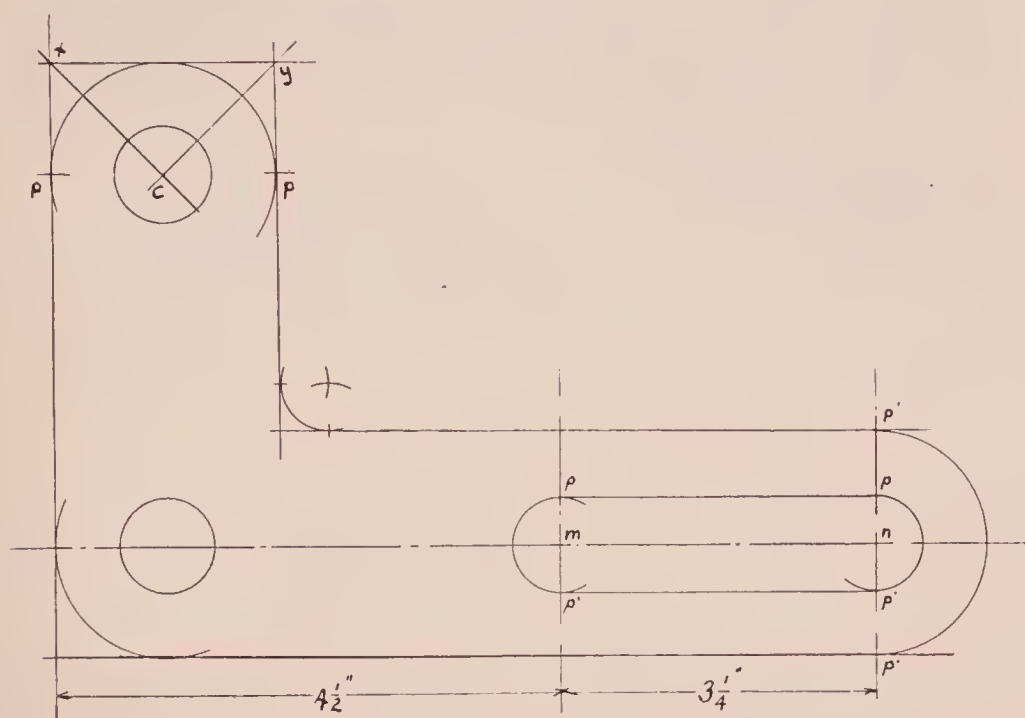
The front view of a rocker arm showing examples of Case II of tangents.
